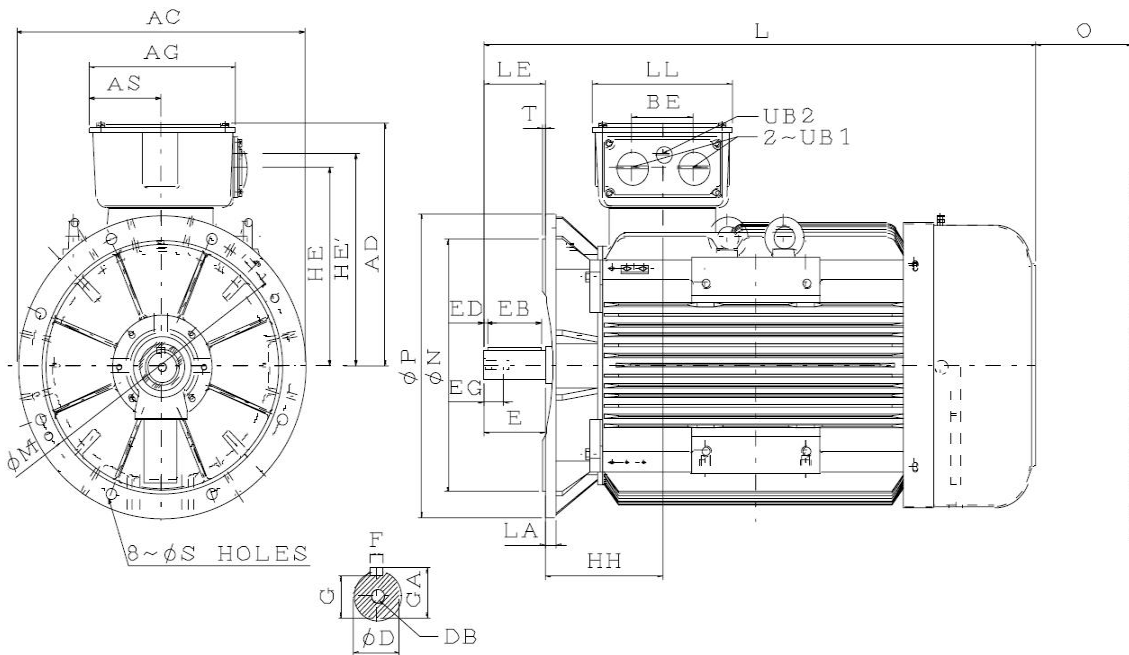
Outline drawing of cast iron design, flange version, mounting B5, frame size 315
